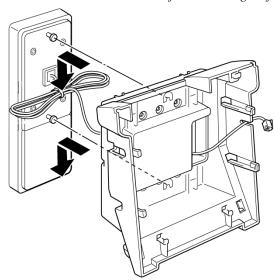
Mounting Wall Mount Unit on the Wall Plate
